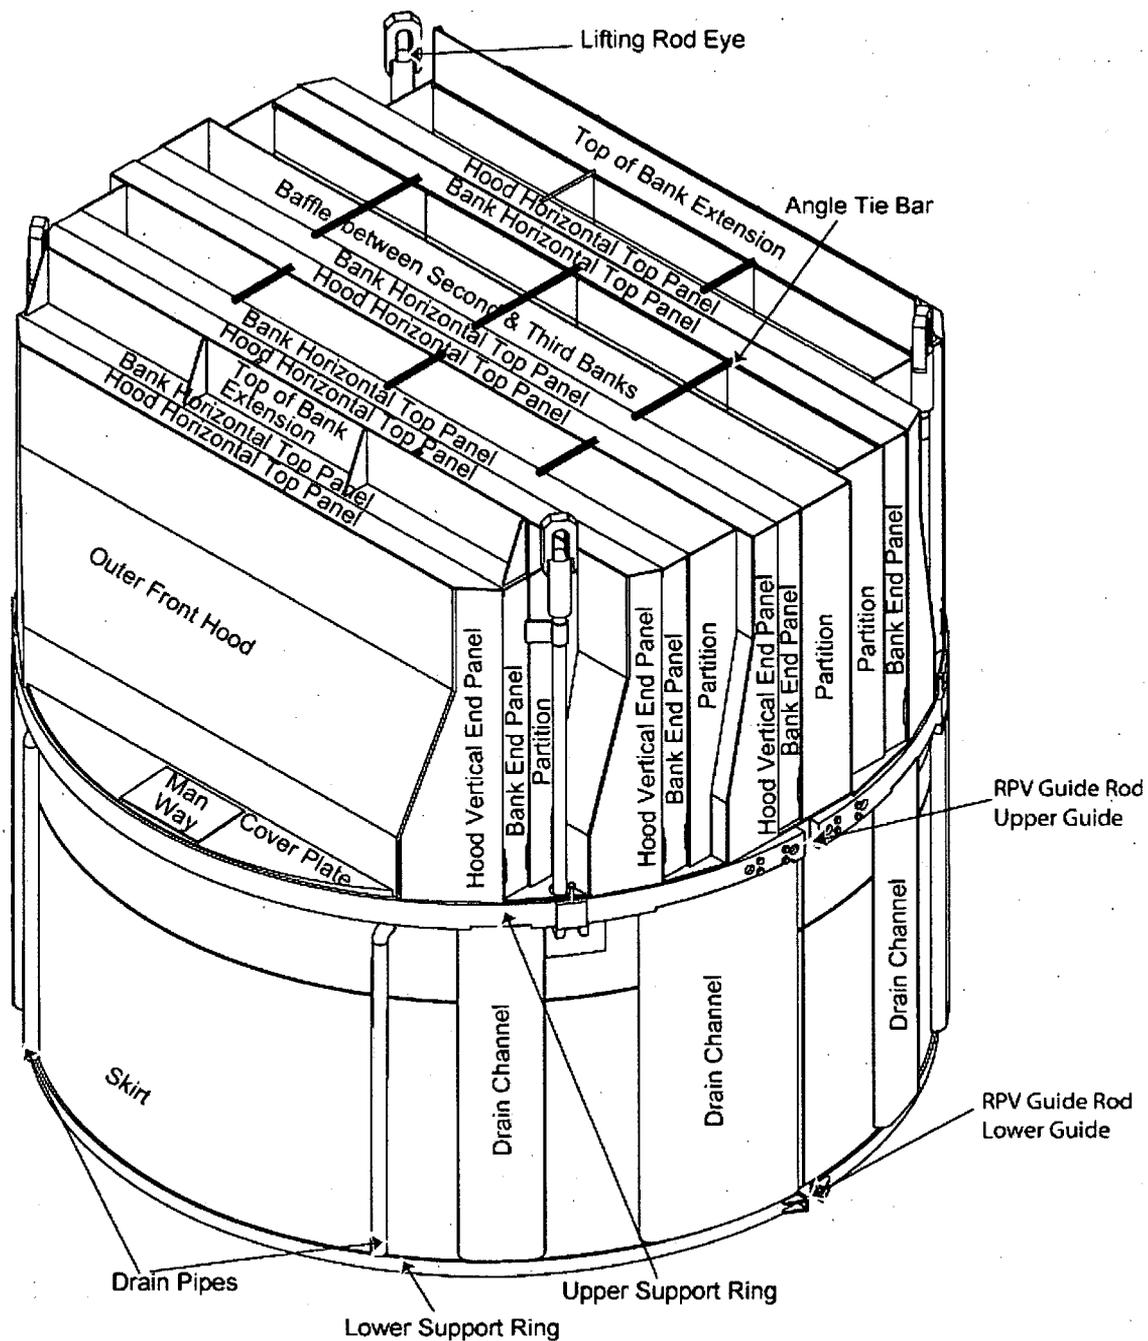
Typical Steam Dryer (BWR/4 Slant Hood Design Shown)
